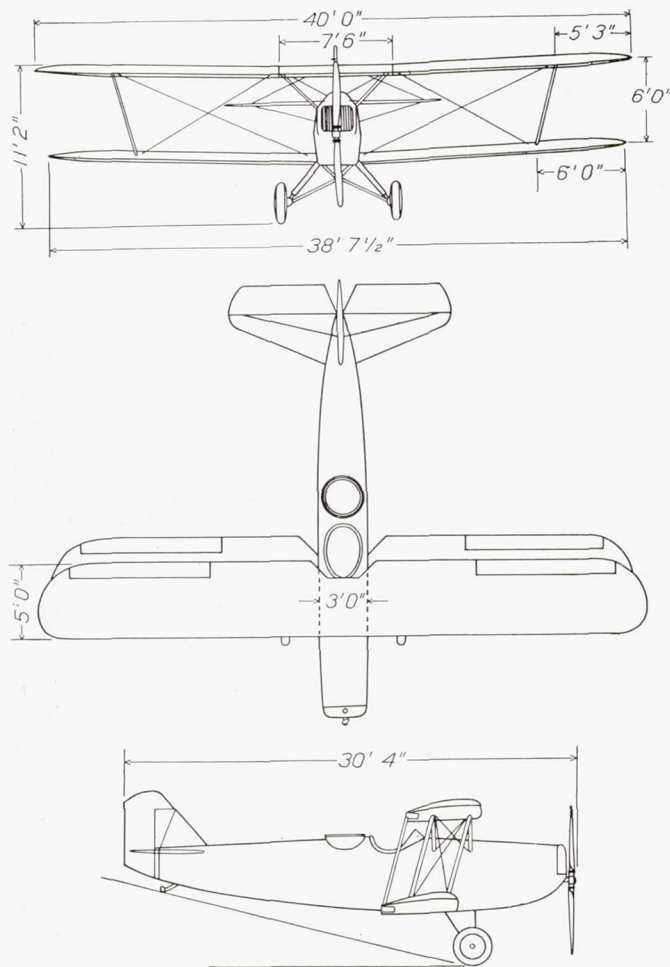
Line drawing and dimensions of the O-2H airplane.
